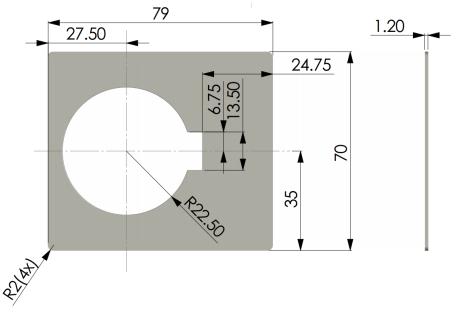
Mechanical drawing of the wireless charger PCB (top view).
